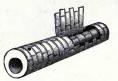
Explosion of a Cornish-boiler from corrosion of the shell.
